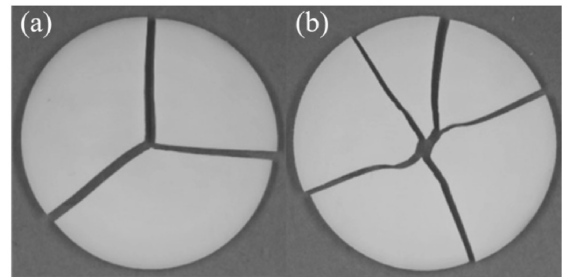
Typical crack-patterns of fractured specimens for the B3B- (a) and RoR- (b) test.
